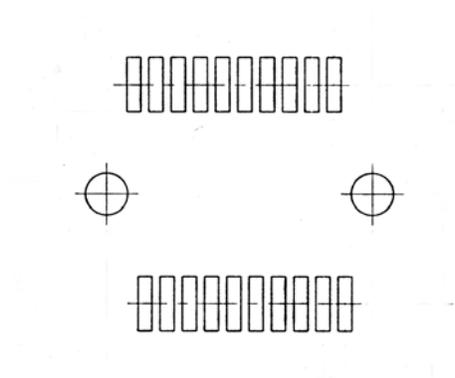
ILLUSTRATION FOR CONNECTOR PC BOARD LAYOUT, SFF-8083
